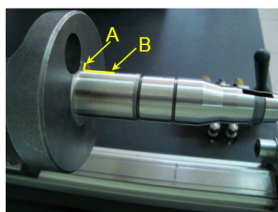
Plant view of the MCG technology installed in the GER machine ready to grind the shaft.
